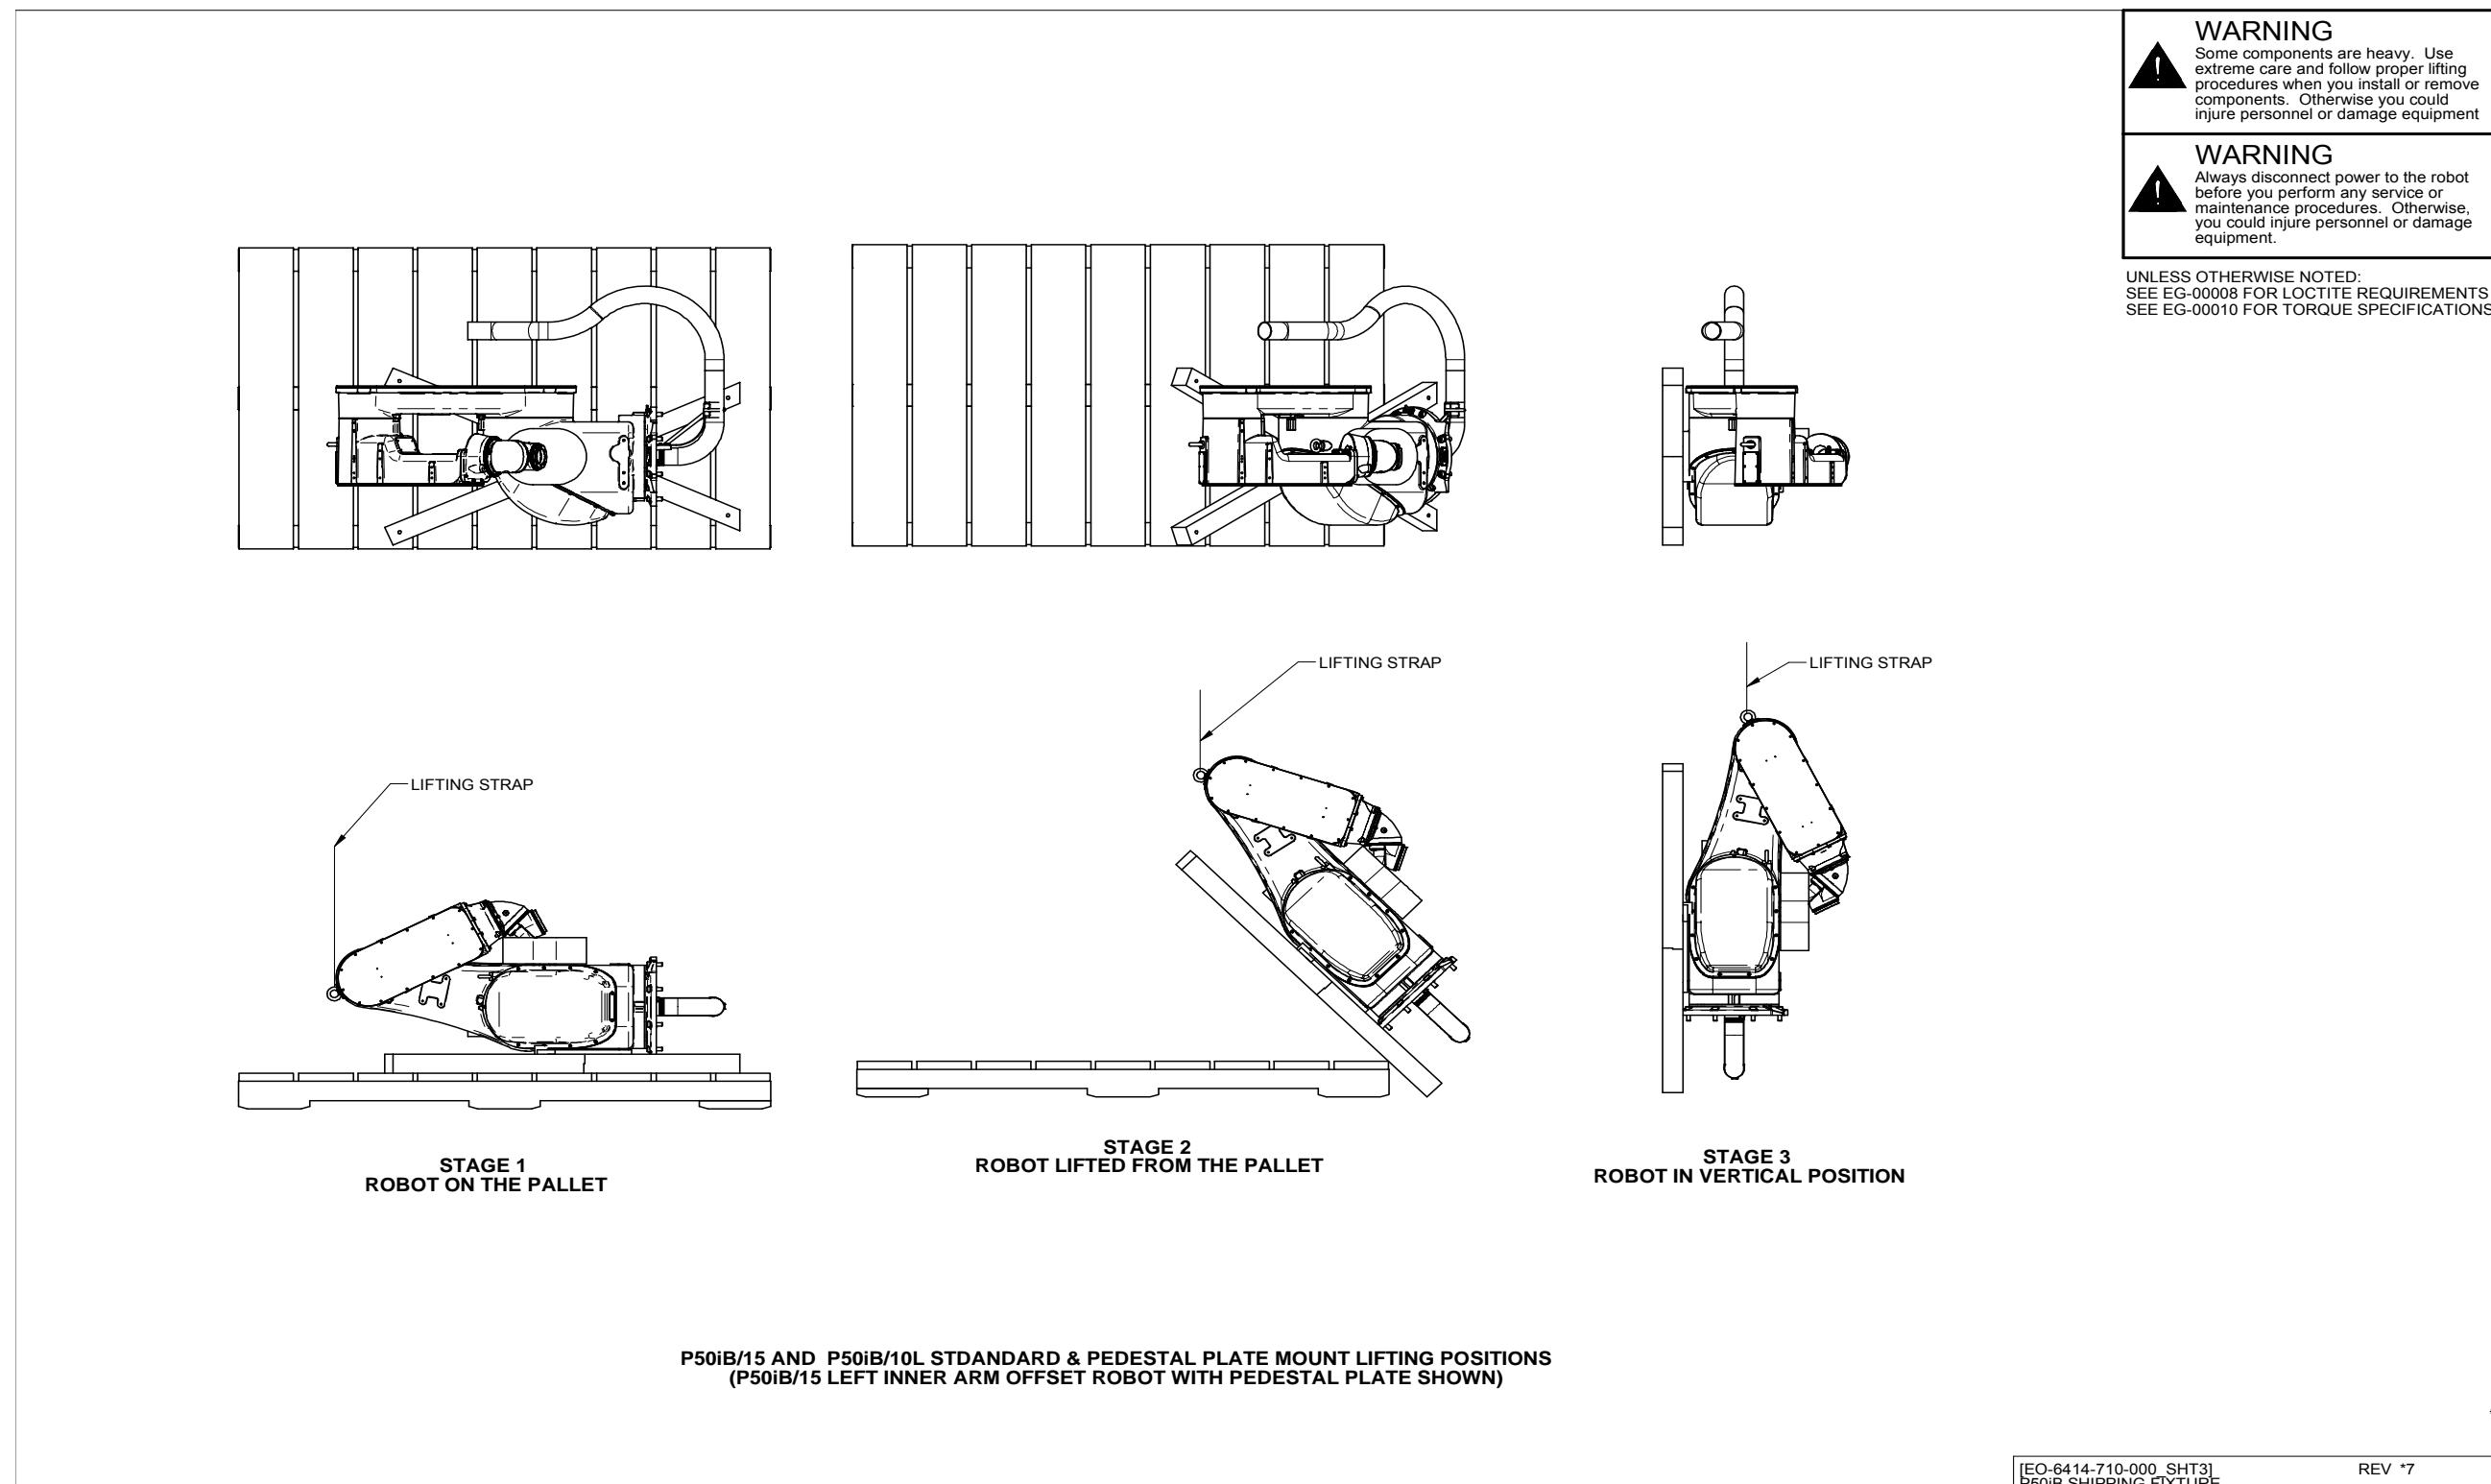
EO-6414-710-000 SHT3, P50iB SHIPPING FIXTURE
